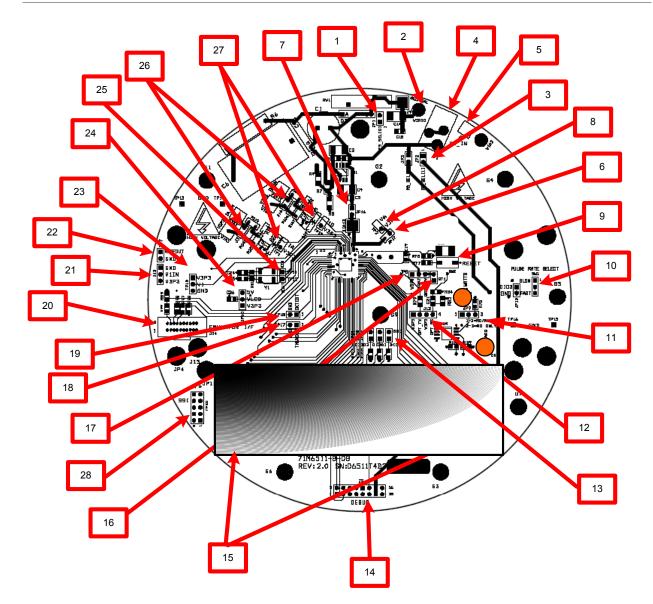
71M6511 4-Layer Demo Board: Board Description
